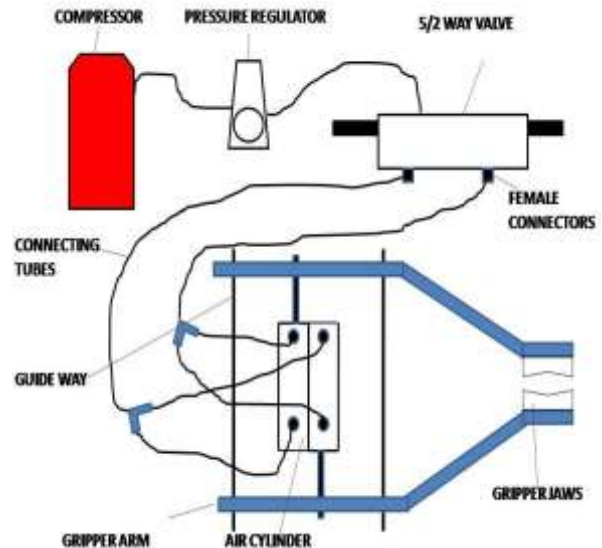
FINAL ASSEMBLY OF AIR COMPRESSED GRIPPER TECHNOLOGY
